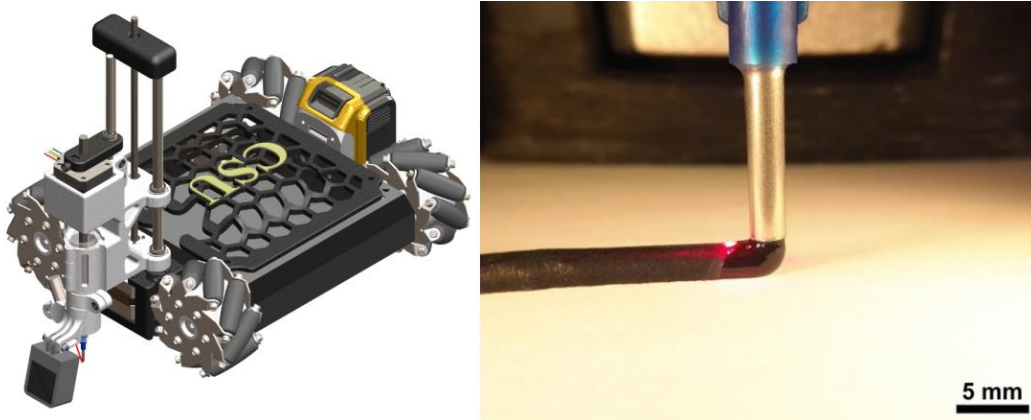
Rendered view of the camera attachment on the left, and on the right side is an image taken using the camera.
